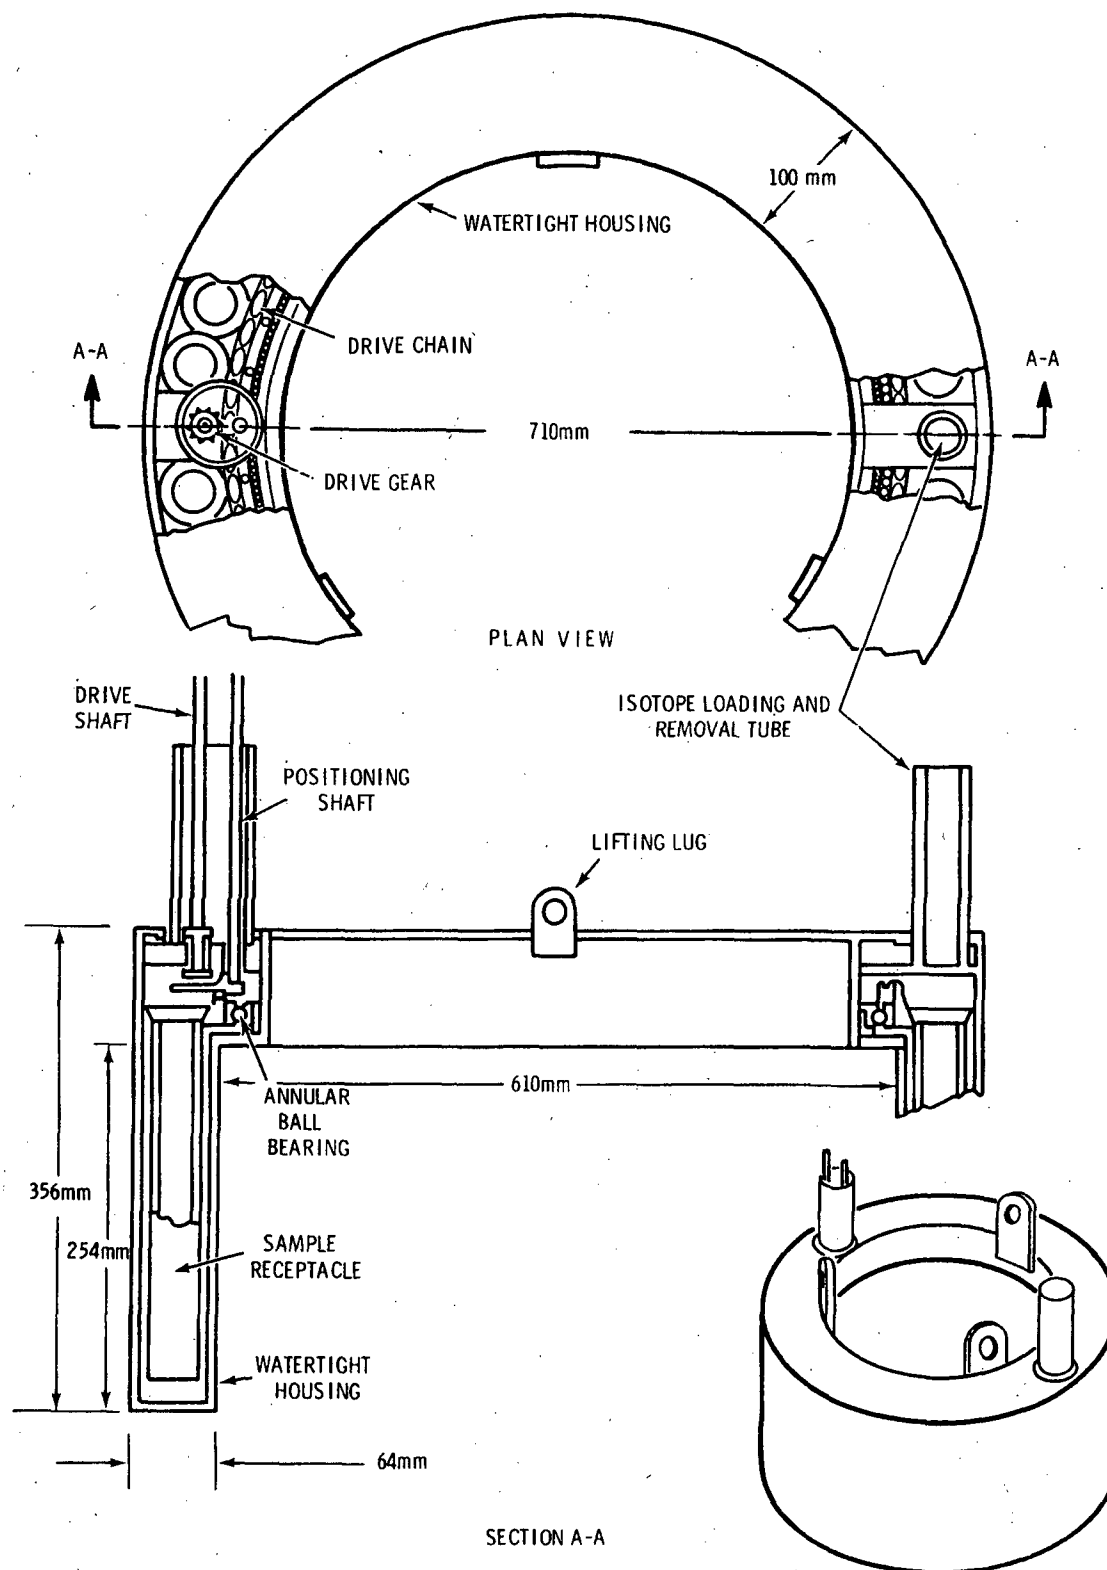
Rotary Specimen Rack (Lazy Susan)
